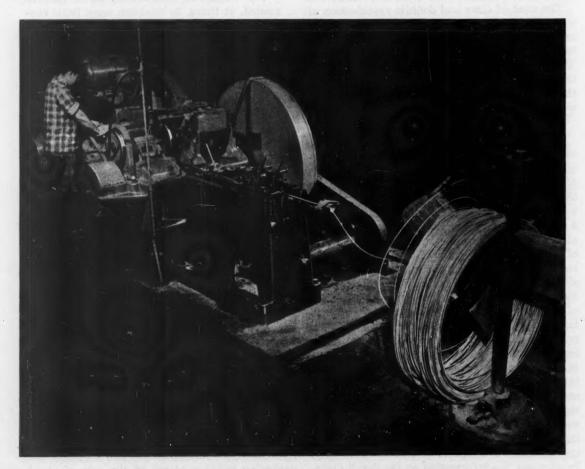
, High-carbon steel wire is fed through a drawing die and into a double-end cold honder which upsets a ball on each end of push-rod blanks cut from the wire.
